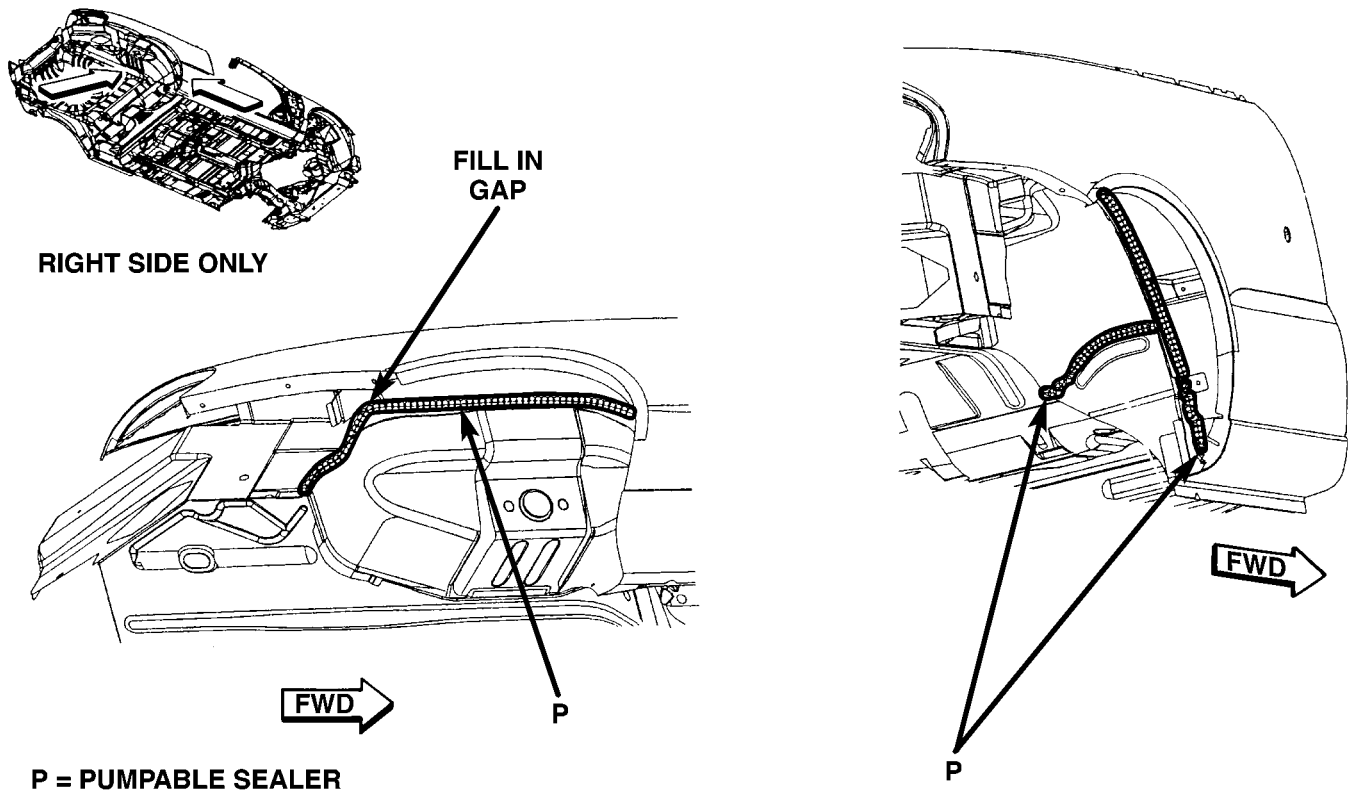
REAR WHEEL HOUSE - RIGHT SIDE
